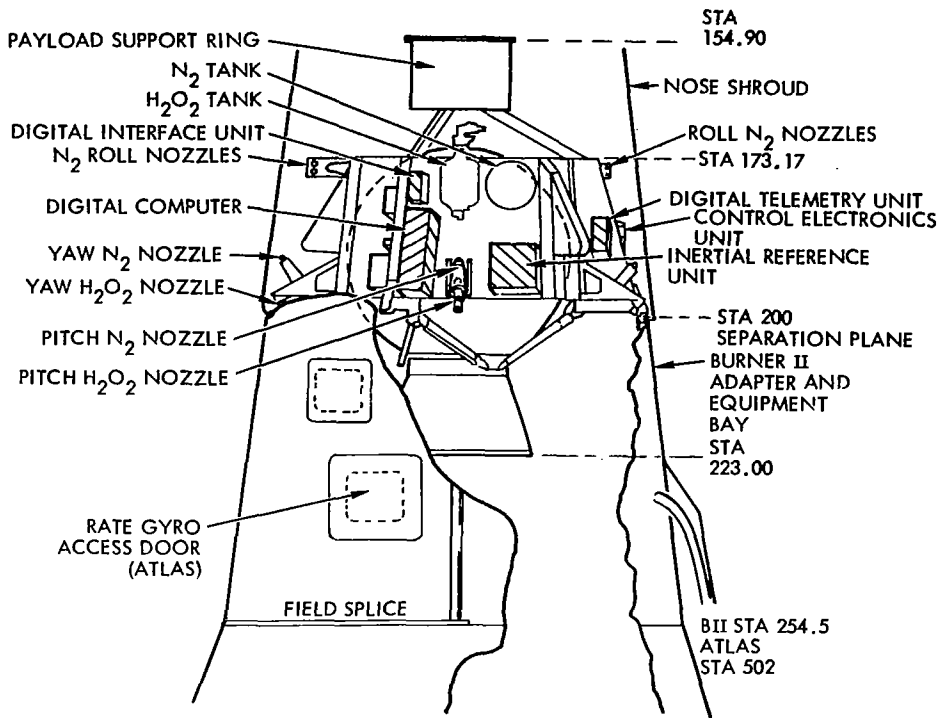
Equipment Location and Mounting Within the Burner II Stage
